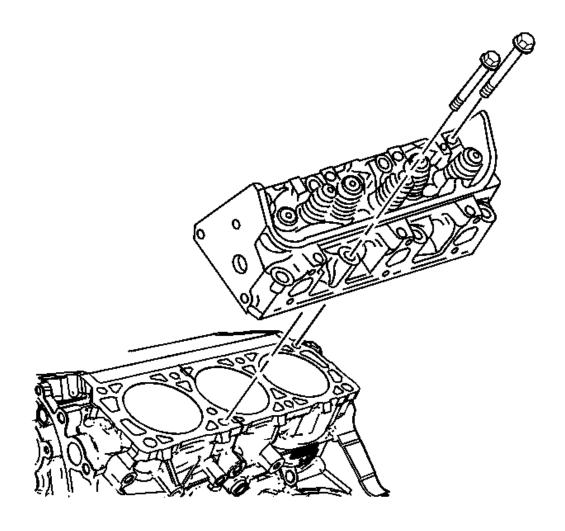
Removing/Installing Cylinder Head Courtesy of GENERAL MOTORS CORP.
